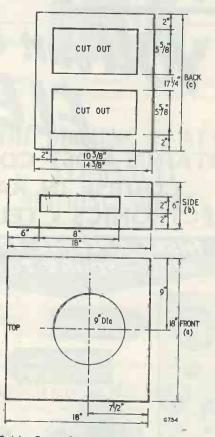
(a). Front of cabinet, (b) cut-out for control panel and (c) back of cabinet
